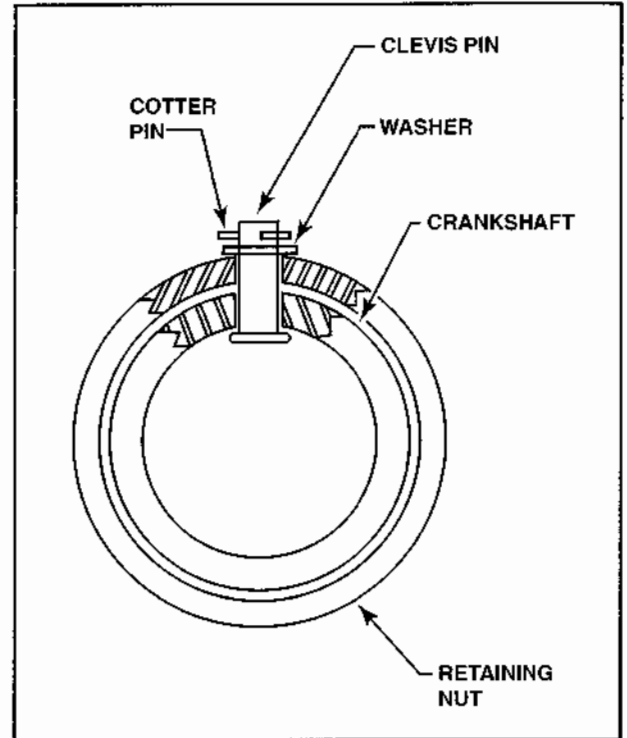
To safety the retaining nut on a tapered shaft propeller installation, a clevis pin is installed through the safety holes in the retaining nut and crankshaft. The clevis pin must be installed with its flanged head toward the center of the crankshaft.
